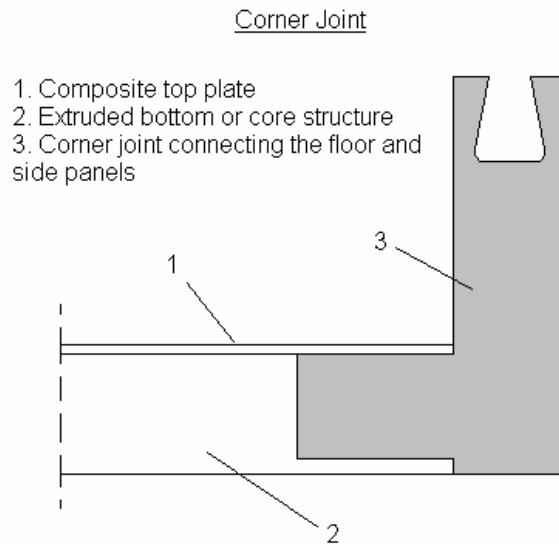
Corner Joint for Connecting the Floor Platform to the Sidewall or Side Panels of a Van Trailer
